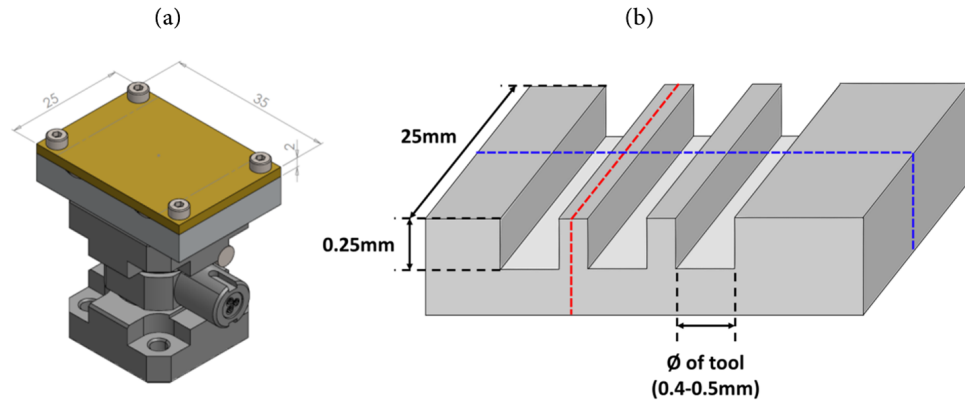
(a) shows the workpiece mounted onto the load cell, (b) shows the slotting process that was carried out.
